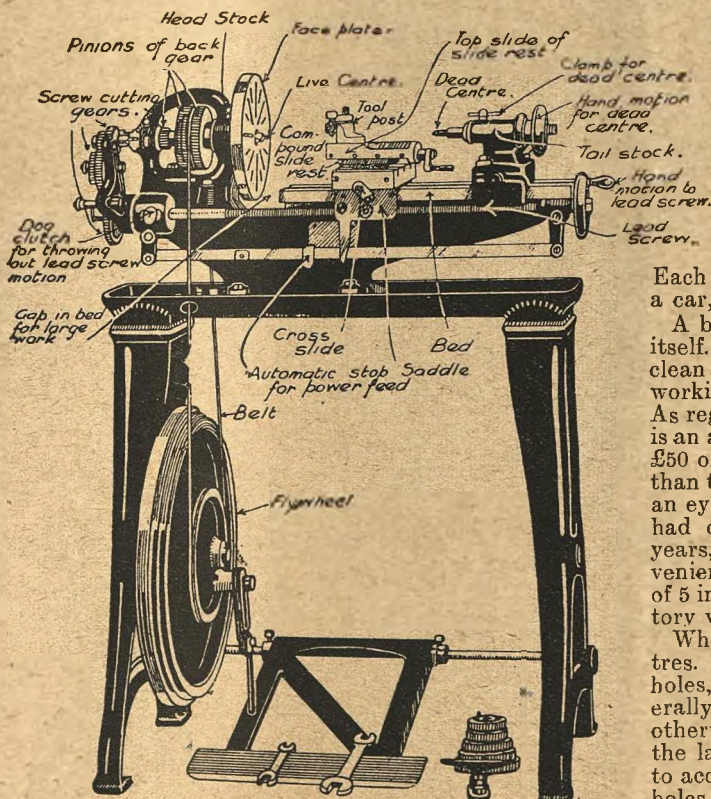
The working parts of a 3½ in. Drummond lathe.
